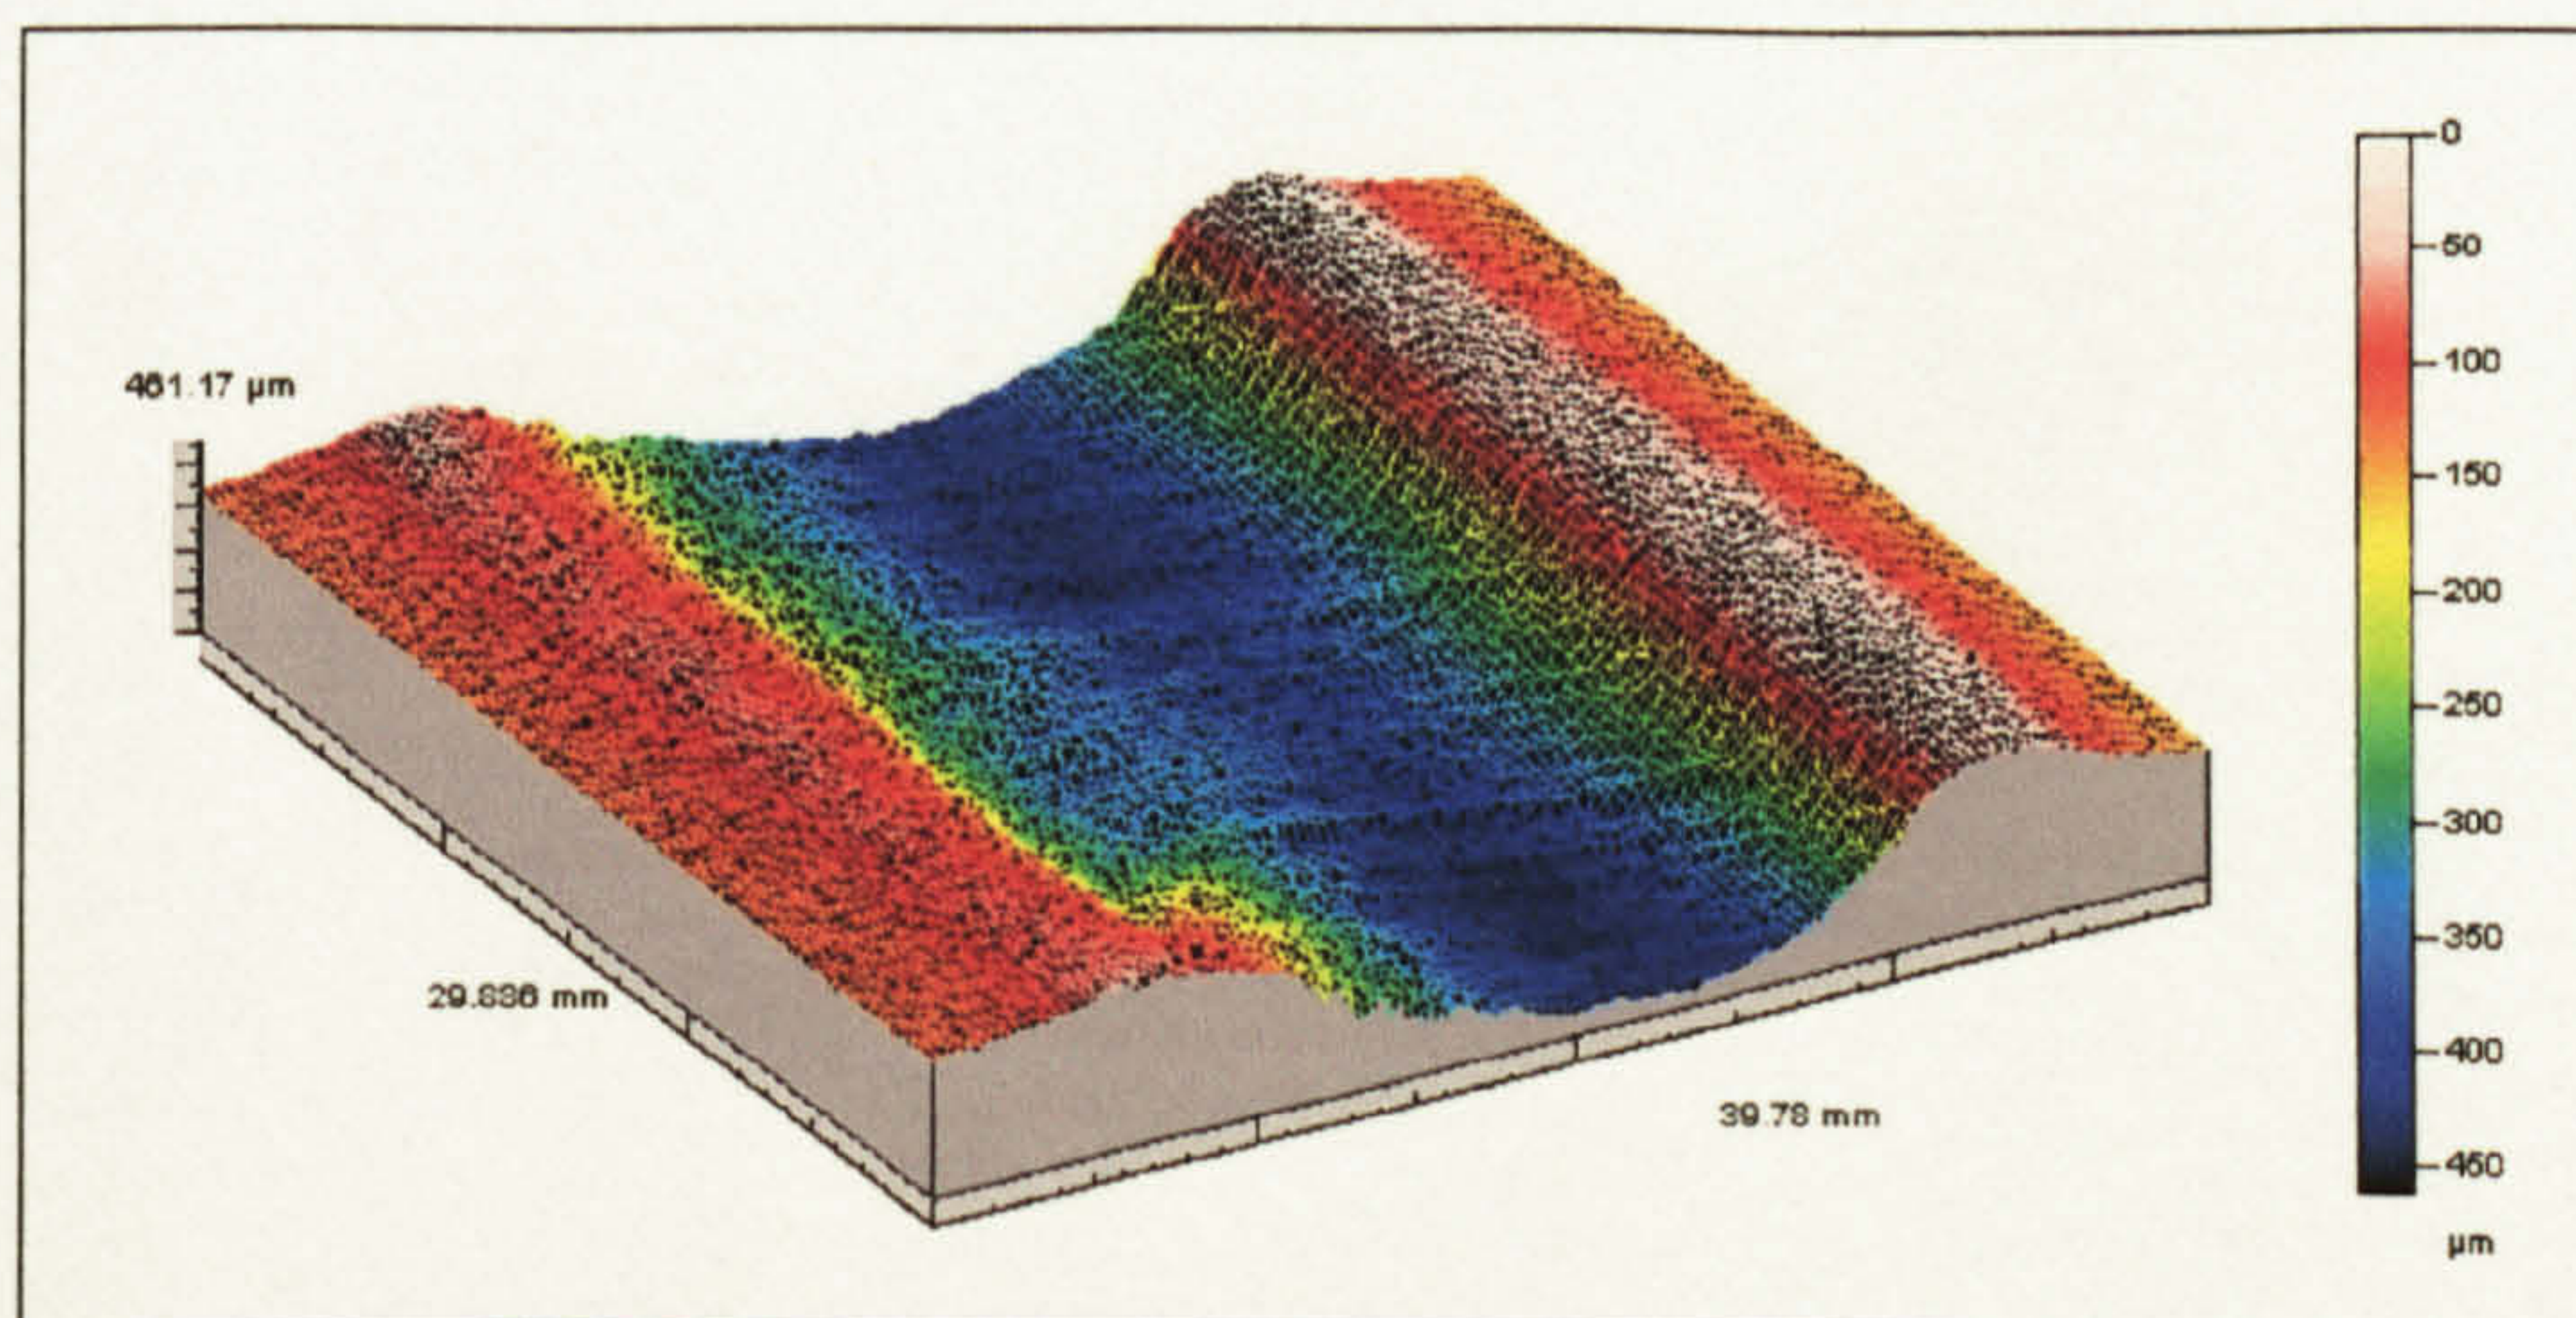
Three dimensional representation of the geometry of the 2nd pass side of a FS DP weld in AA 5383-H321.
